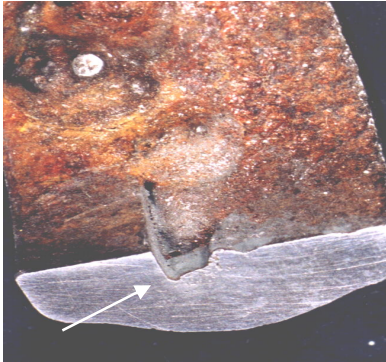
Lack of fusion in weld of pipe (Ø38, thick-3mm)
